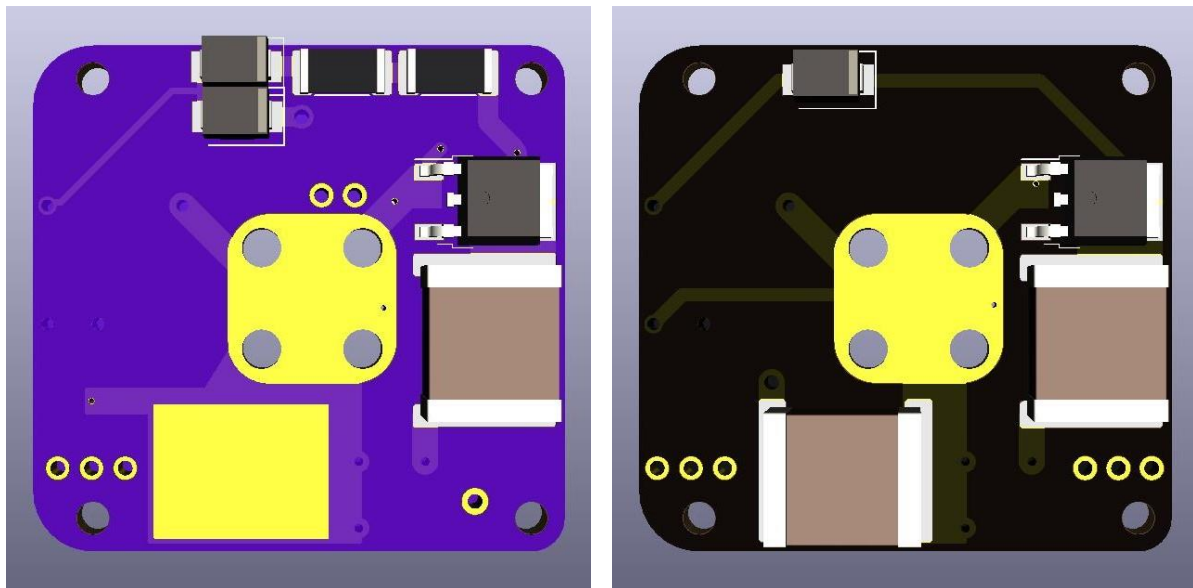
AIS-gPPT3-1C Thruster Module PCB Front – V3 (left), V4 (right)
